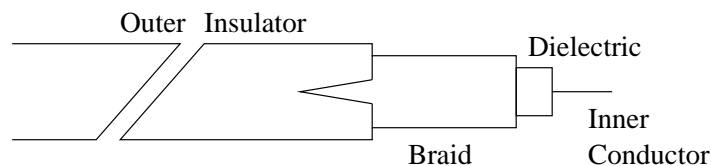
The stripped coaxial cable as described in section 3.2.1.
